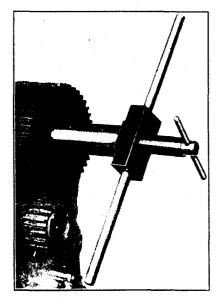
Pusher 85797 for Installing Camshaft Sprocket
